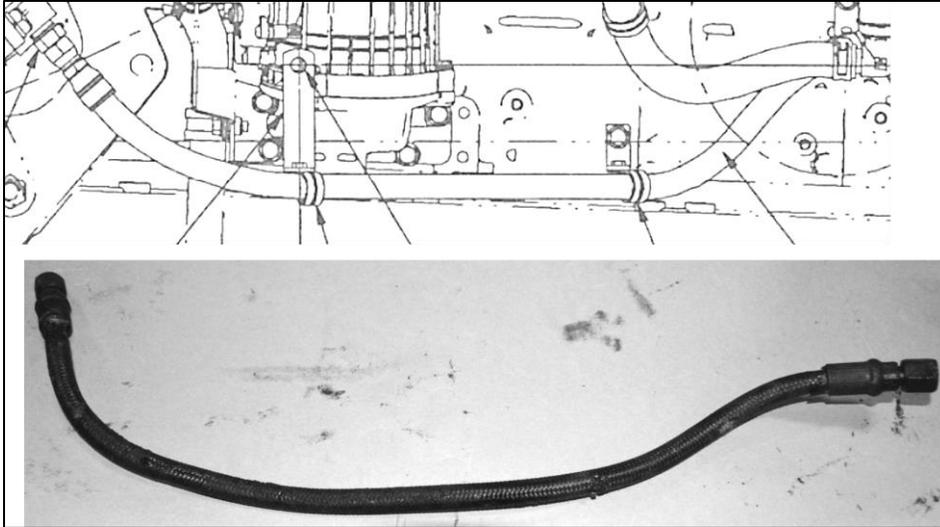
Closeup of Power Steering Hose Failure of Steel Wire Braiding with Beading
